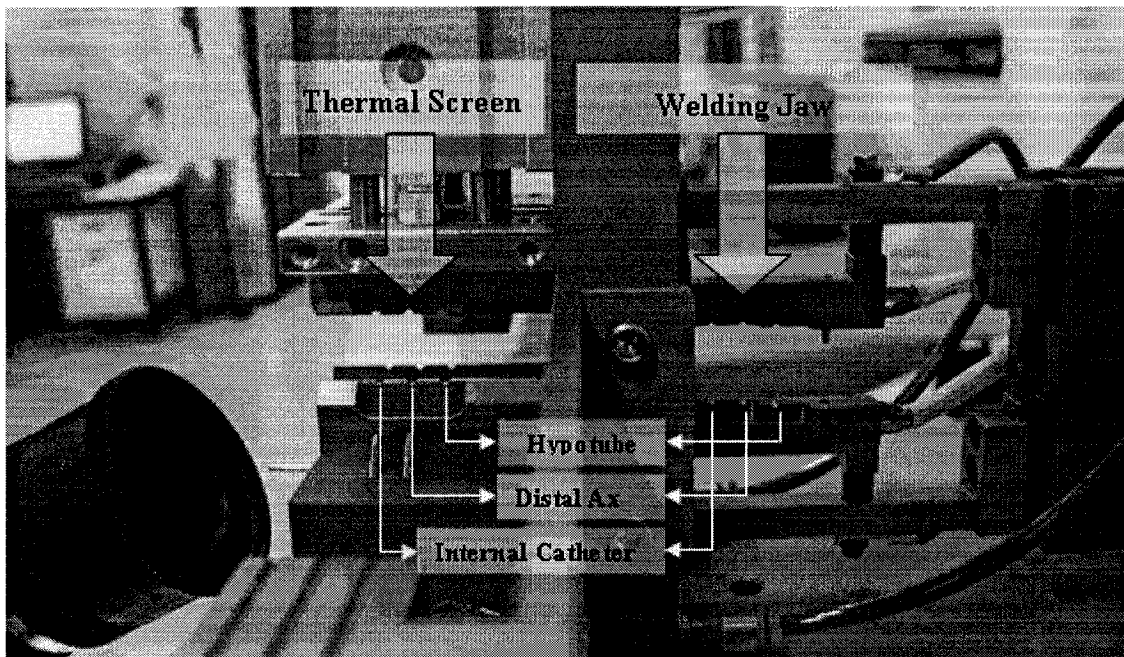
Welding Machine Parts (Permission to print granted by Interface Associates)
